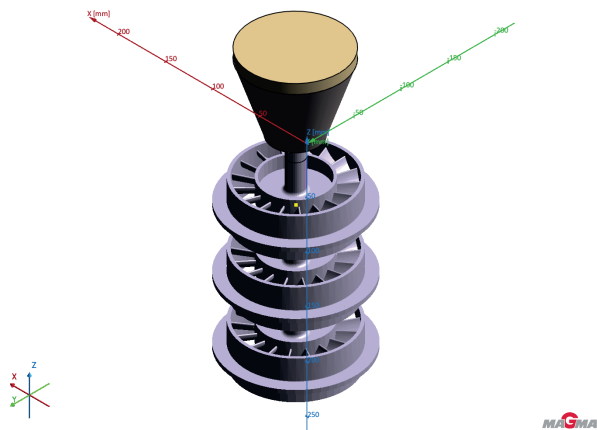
Pouring basin and hot-topping geometry generated in the MAGMASOFT® geometry module
